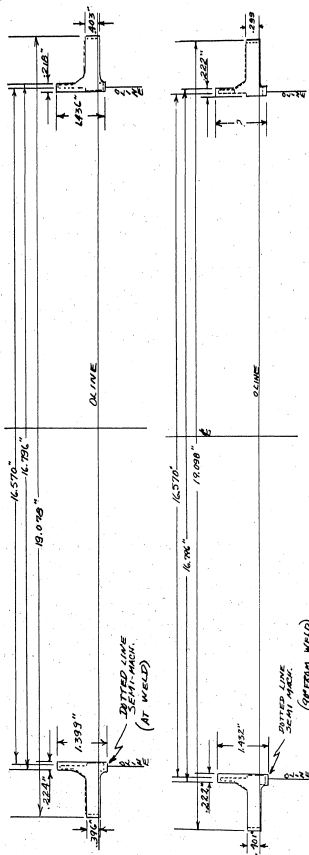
DIMENSIONAL INSPECTION LAYOUT OF P/N 226962.
